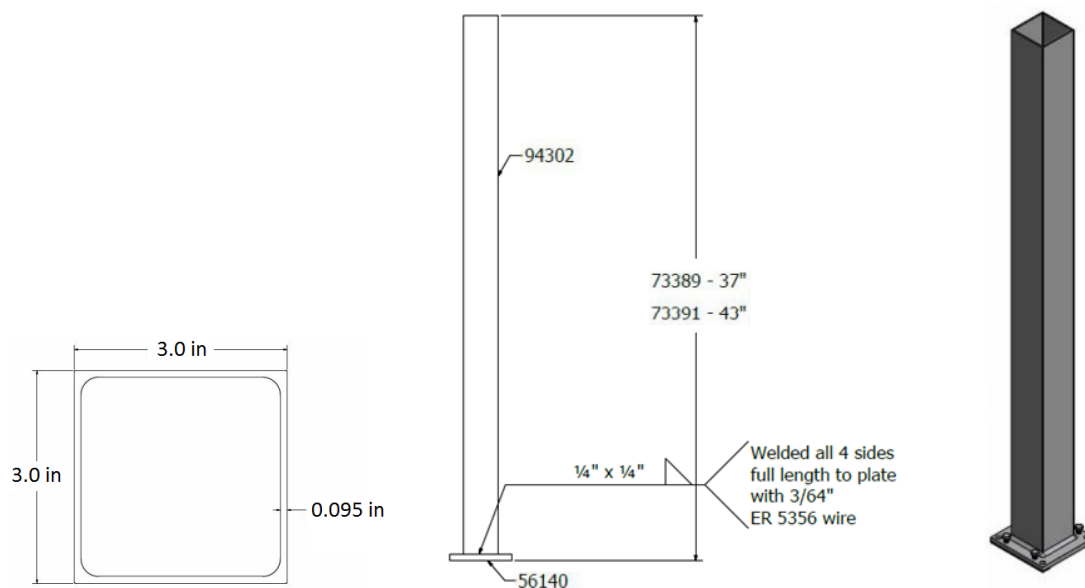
3" SQUARE ALUMINUM SUPPORT POST ASSEMBLY
